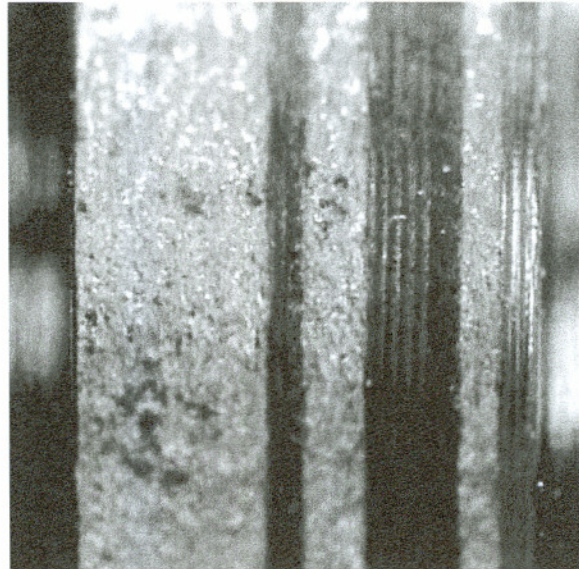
Material transfer and roughening of bottom roller surface.
